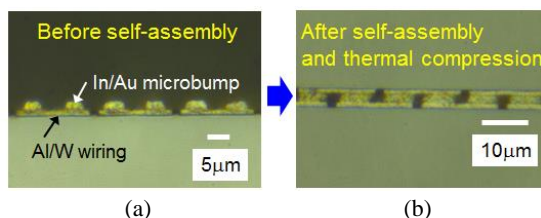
Photomicrograph of cross-sectional view of stacked dies with In/Au microbumps fabricated using self-assembly.
